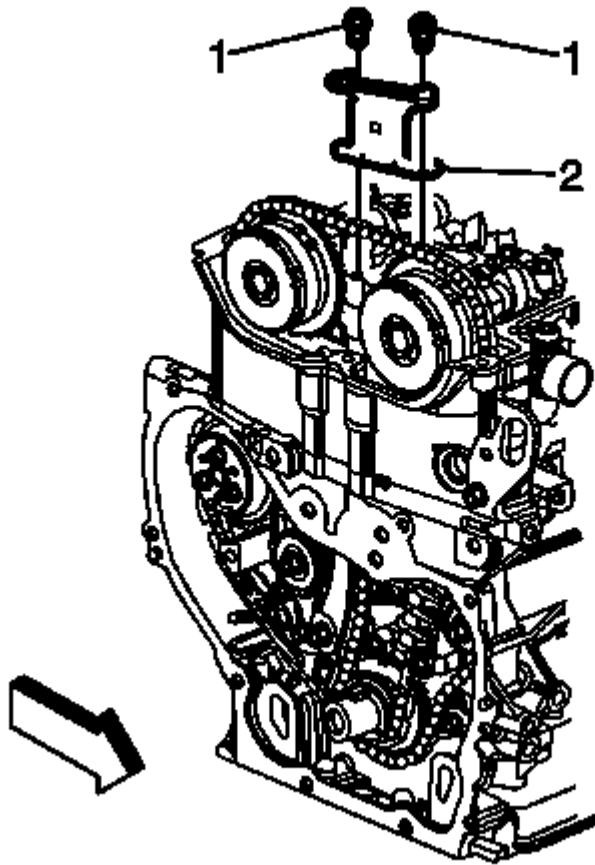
Upper Timing Chain Guide Bolts And Guide
